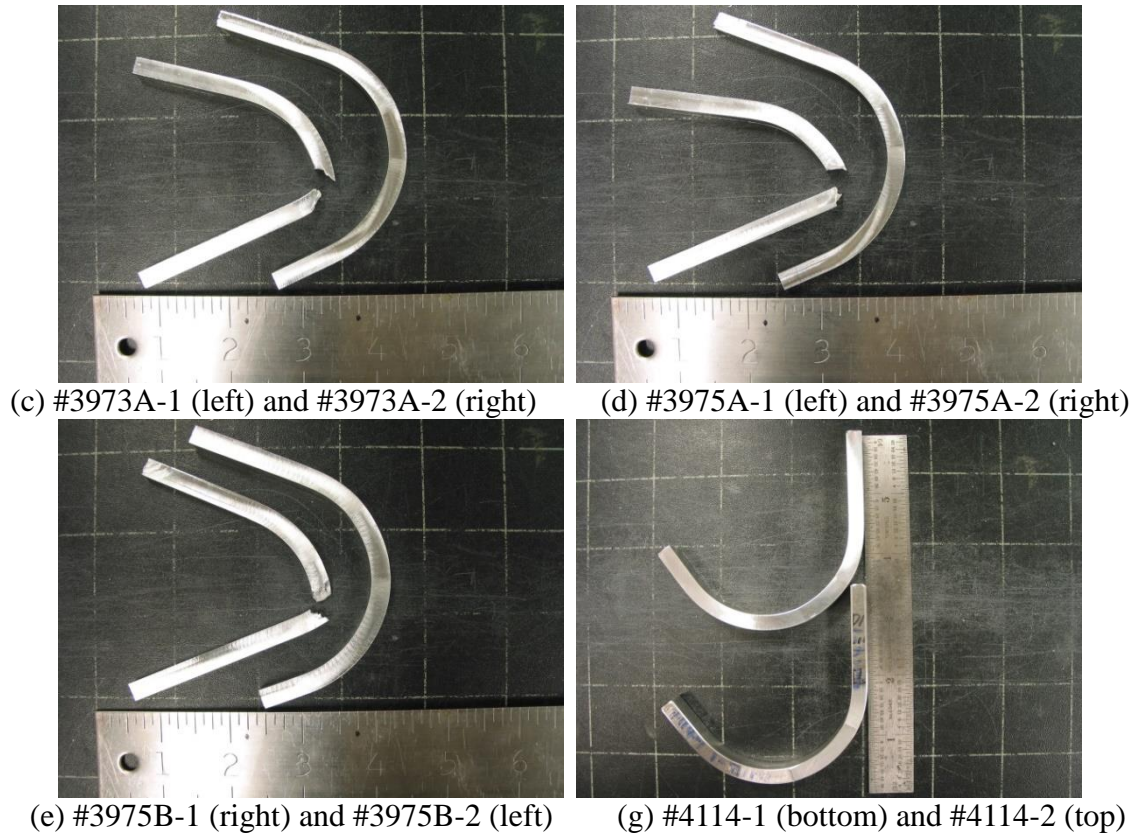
Specimens of defect free parts of SSSP after face bending testing: PWHT
